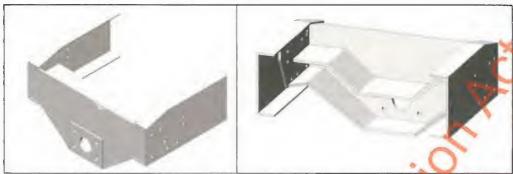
Drawbeam design 17452, Isometric view (left), Isometric view rear (right)
